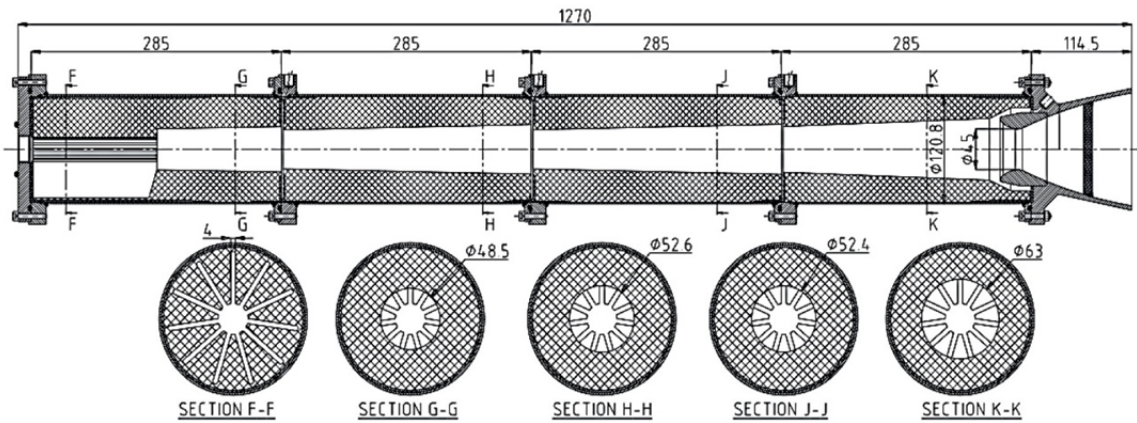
2D dimensional sketch of 1881 motor design with scale 1:31
